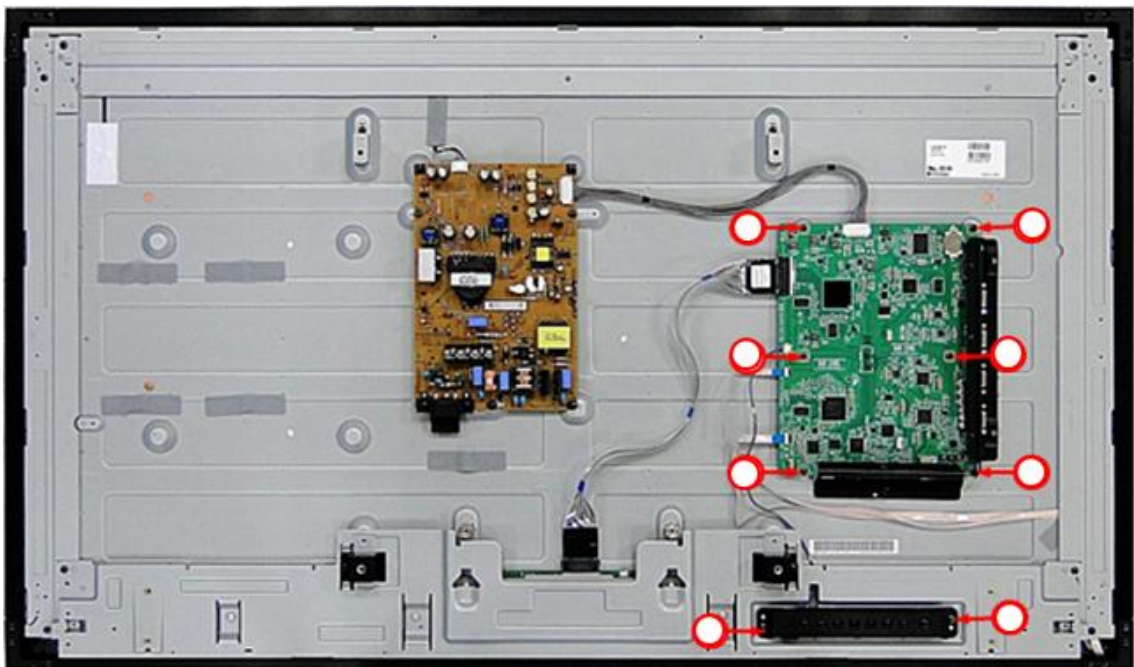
Remove screw 8EA & Disassemble Main PCB, Control PCB Assy
